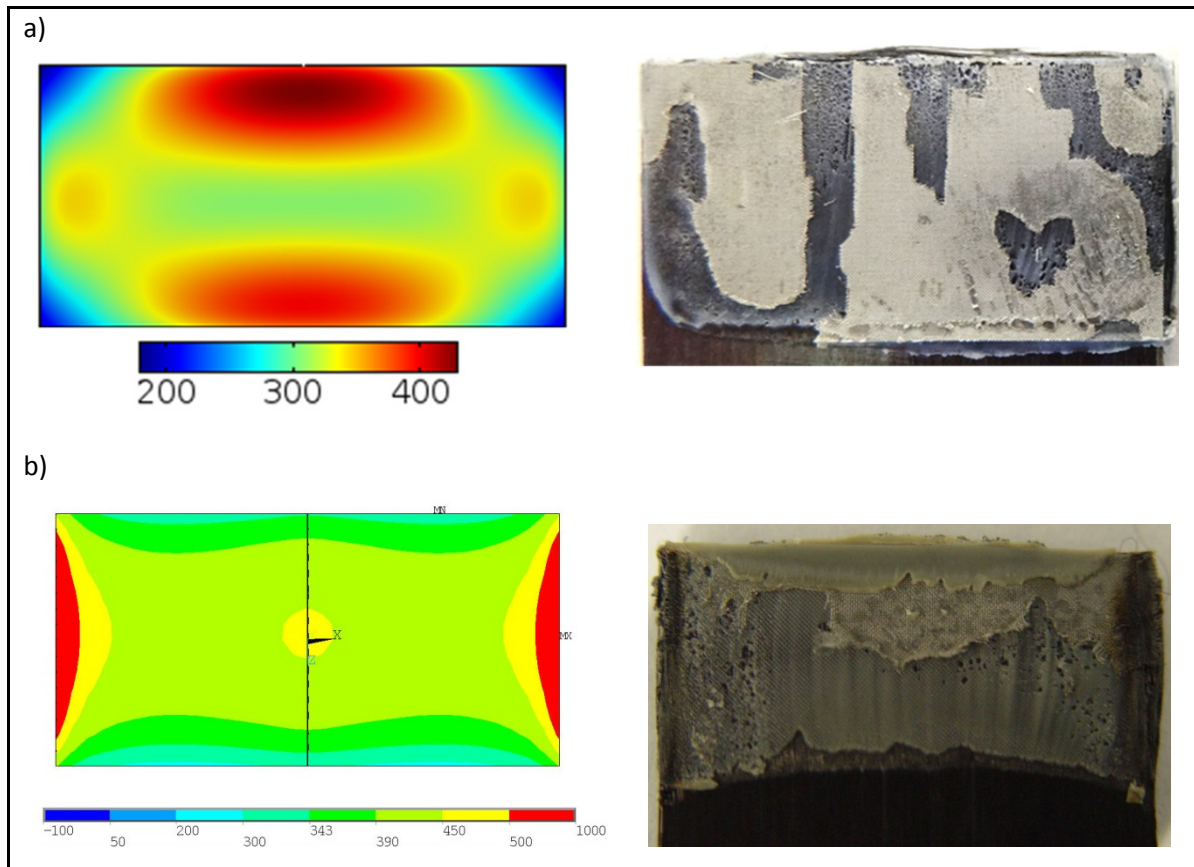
Thermal maps and fracture surfaces: a) induction-welded specimen (HE C and 500 A) and b) results of resistance-welded specimen taken from (Talbot et al., 2013)
